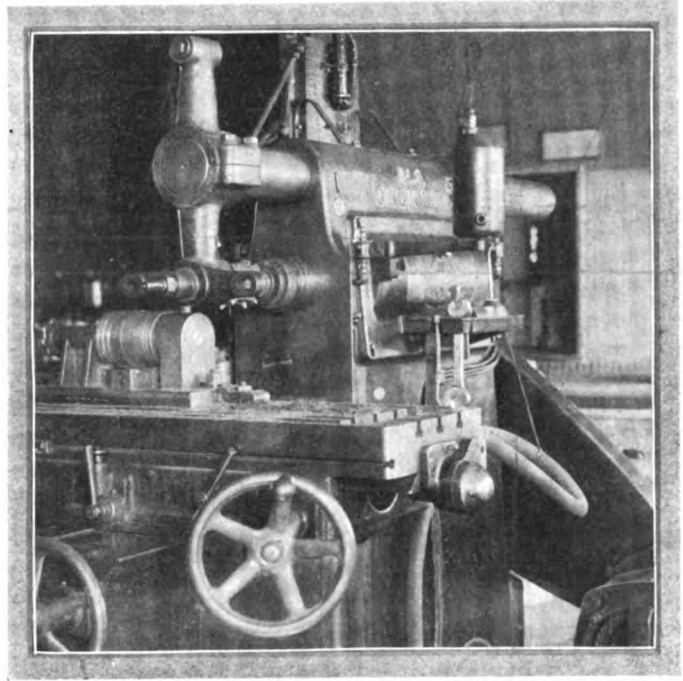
1-horsepower, 1800-220-volt motor driving portable miller on assembly floor
